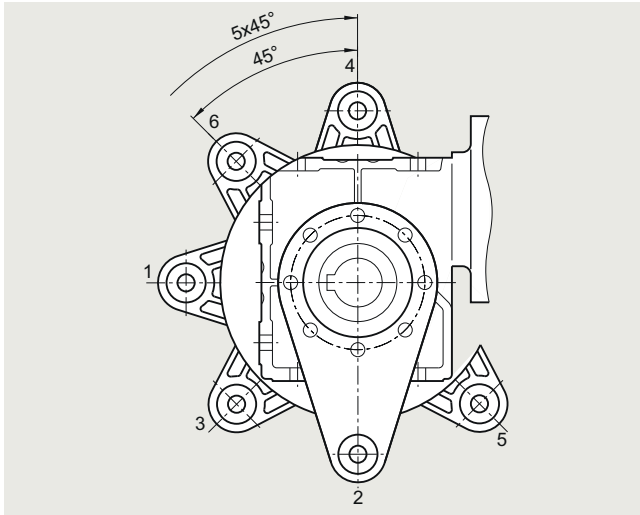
/12 Worm gearboxes S in a shaft-mounted design
